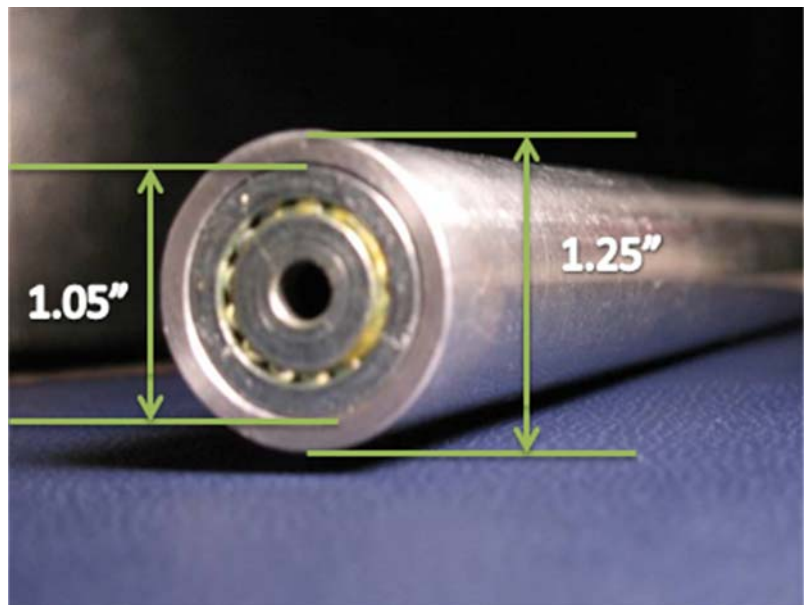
The aluminum rollers have steel ball bearings press fit into each end. This allows for significantly easier patient transport due to reduced friction. Not shown here, the inner diameter of the bearing is 0.25".
